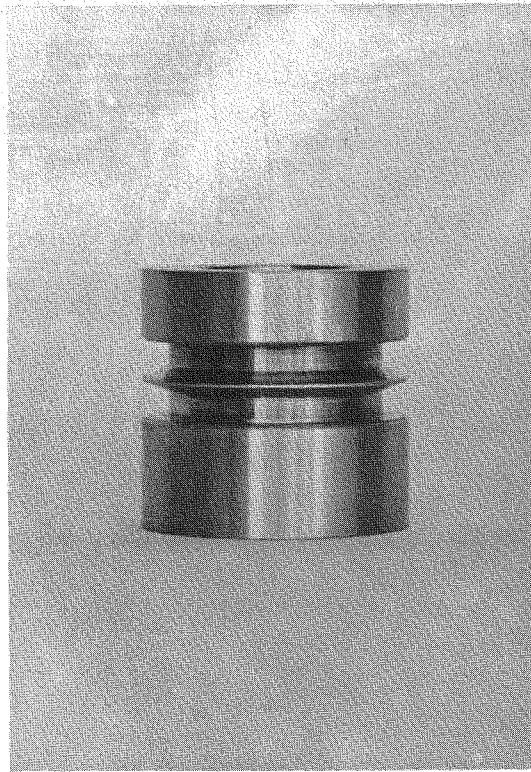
NICKEL-MONEL 400 WELD
